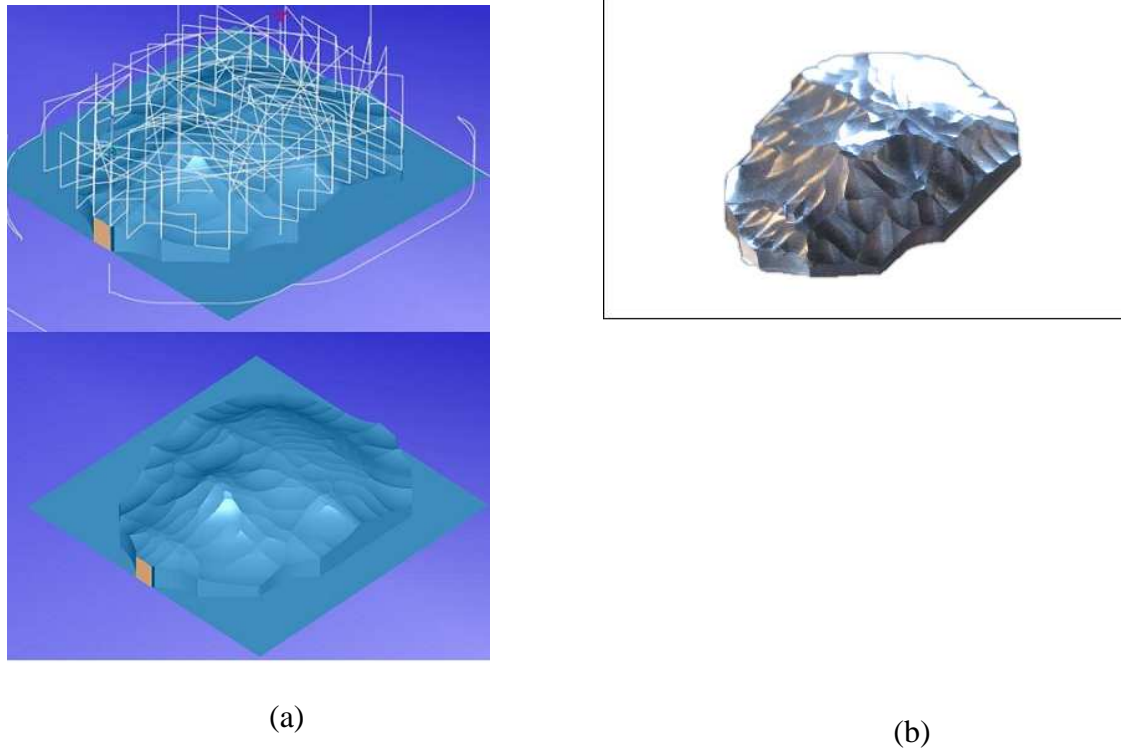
(a) Simulated and (b) machined free form surface and optimized tool path in 3D.
